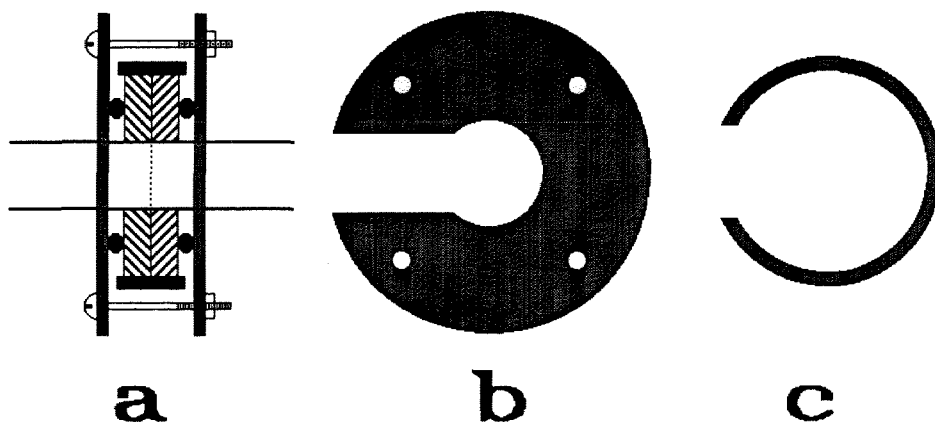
Detail of the flange assembly. a, overall cross section; b, side view of holder; c, side view of c-ring.
